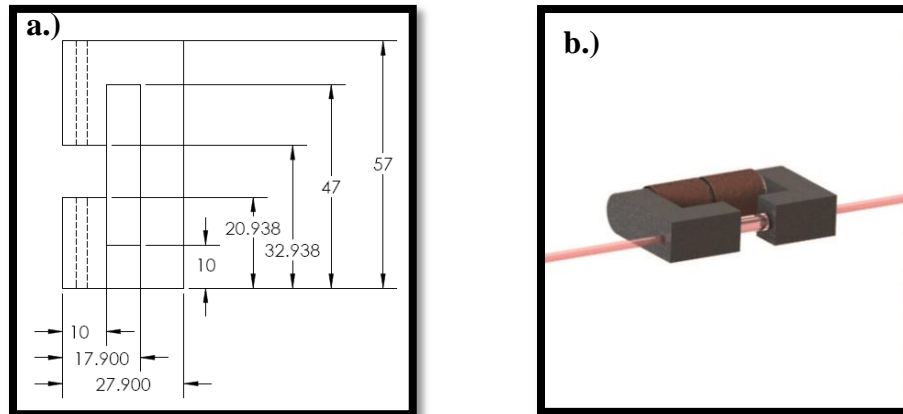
(a) CAD schematic showing dimensions of the custom-machined ferrite modulator with a C core geometry and (b) CAD rendering of air gapped high permeability rotator design.
